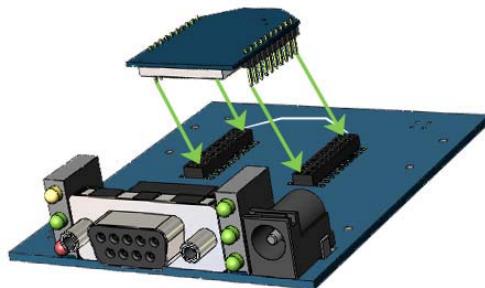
XBee Pro 900 Module Mounting on RS-232 Interface Board
